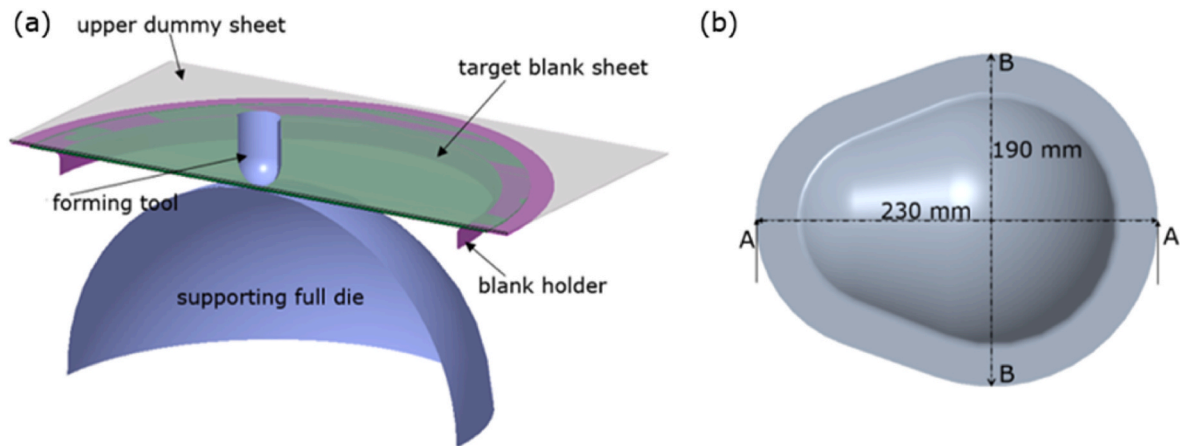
(a) Sectional view of the DL-TPIF process basic setup for the dome case; (b) profile of target workpiece of irregular shape.
